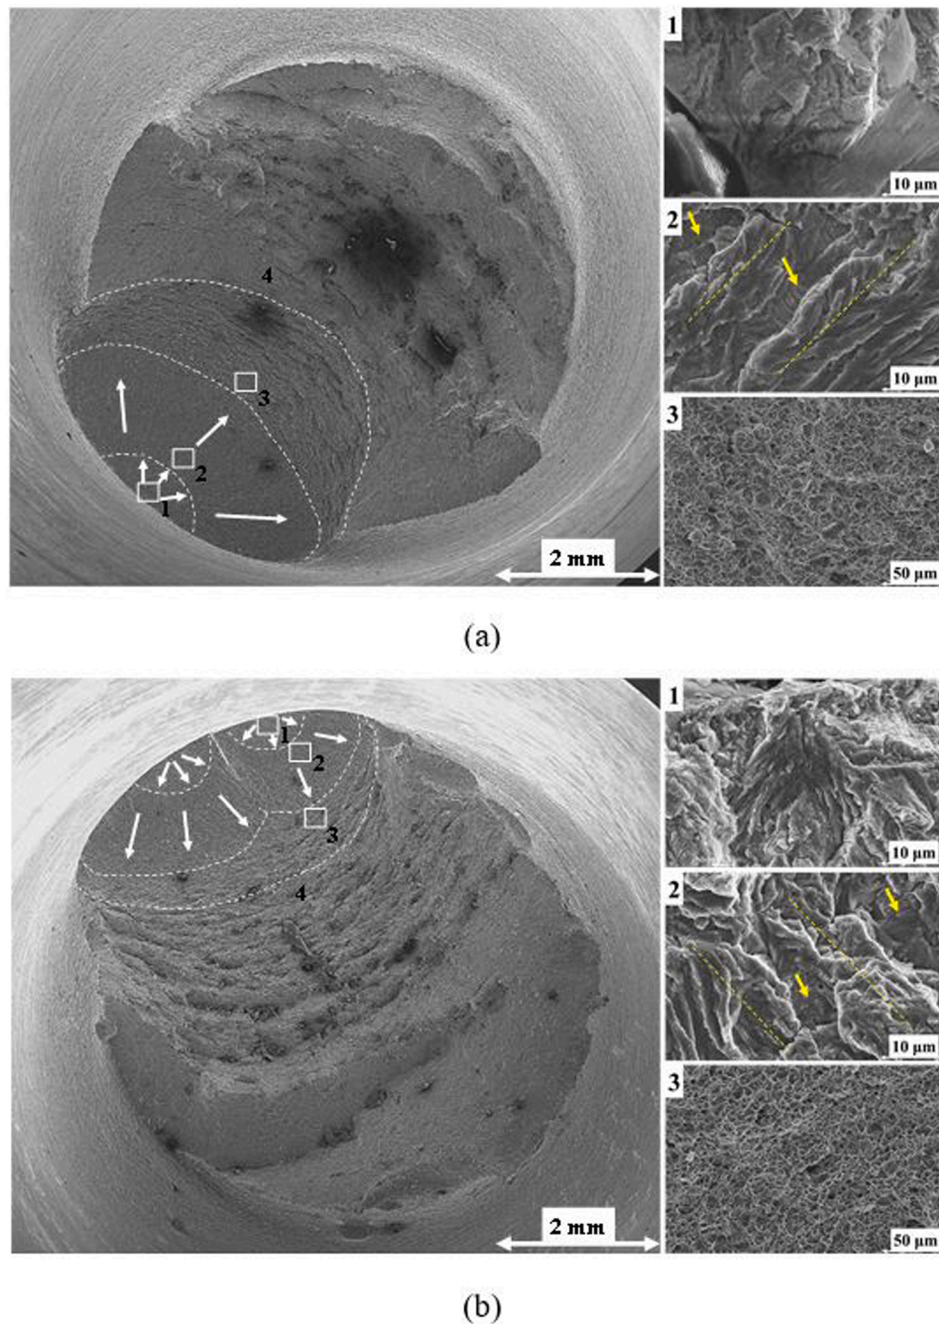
Fracture surface of ER70S-6 WAAM built specimens tested under uniaxial loading condition (a) for vertical, and (b) for horizontal specimens, presenting crack initiation region (1), crack propagation region (2), and ductile fracture region (3), and fast fracture region (4).
